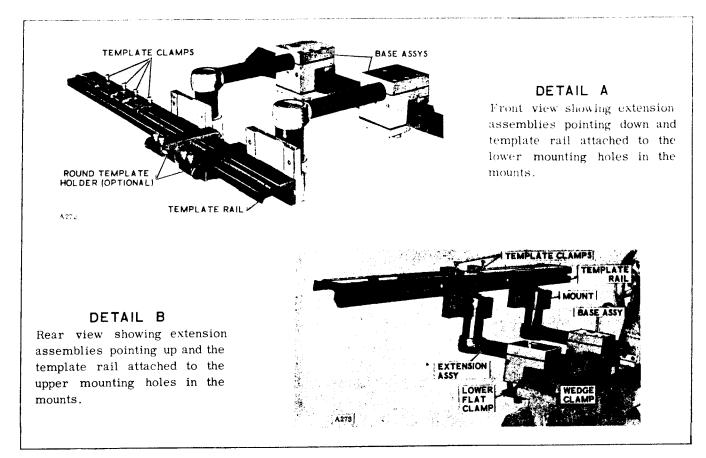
Typical Universal Template Rail Assembly. Used with Mark IIA thru VI Series)
